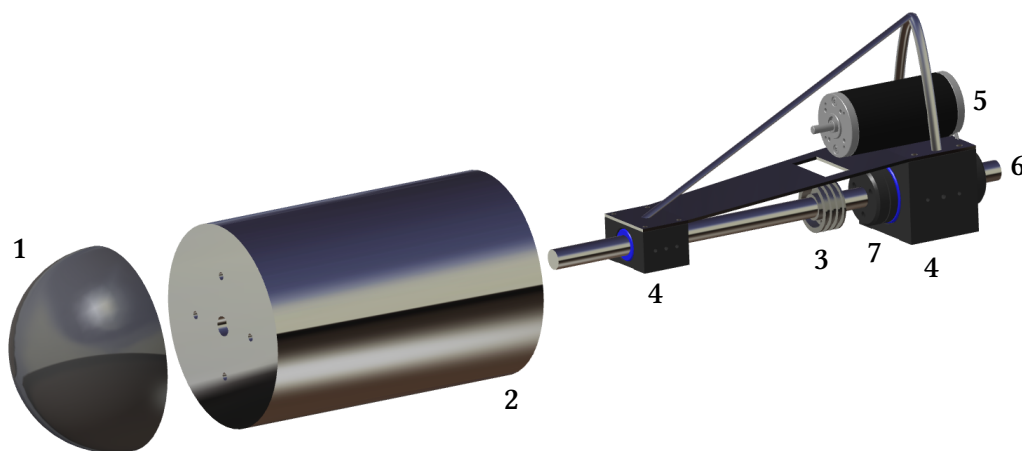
Expanded view of the proposed experimental assembly for a rotating body using replaceable nose-cones; 1) Replaceable nose section, 2) Aerodynamic fairing, 3) Belt driven pulley, 4) Thrust air bushings, 5) D/C motor, 6) Steel shaft, 7) Face collar.
